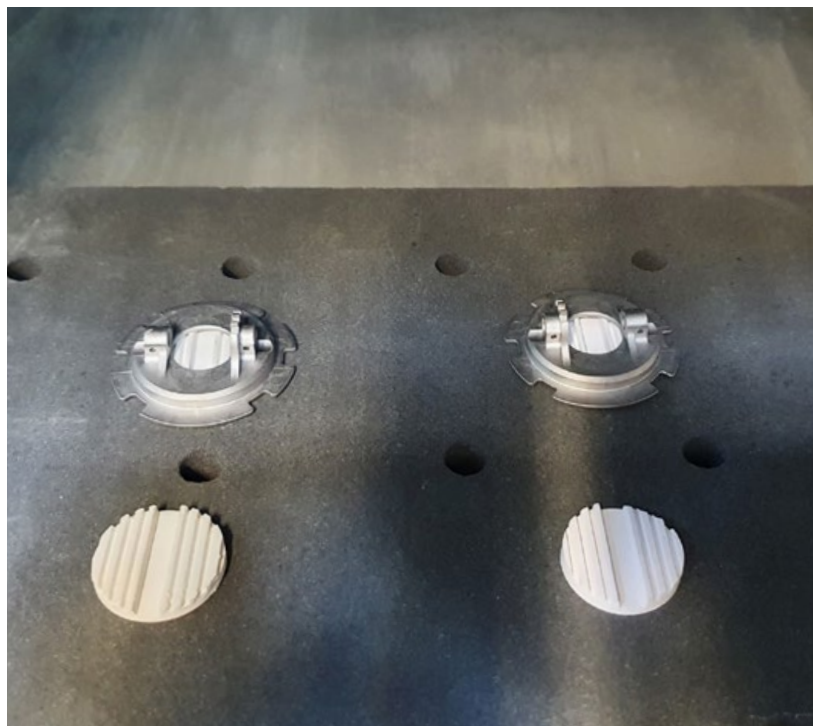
Photo of MIM components sitting on an AM sinter support (left) and Ceramic Injection Moulded sinter support (right) in a sintering furnace
